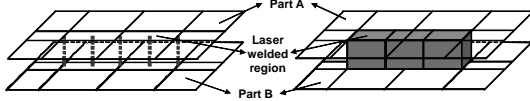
FE modeling method of the laser welded part: (a) simplified laser welding model with a number of beam elements; (b) simplified laser welding model with a number of hexahedron elements.
